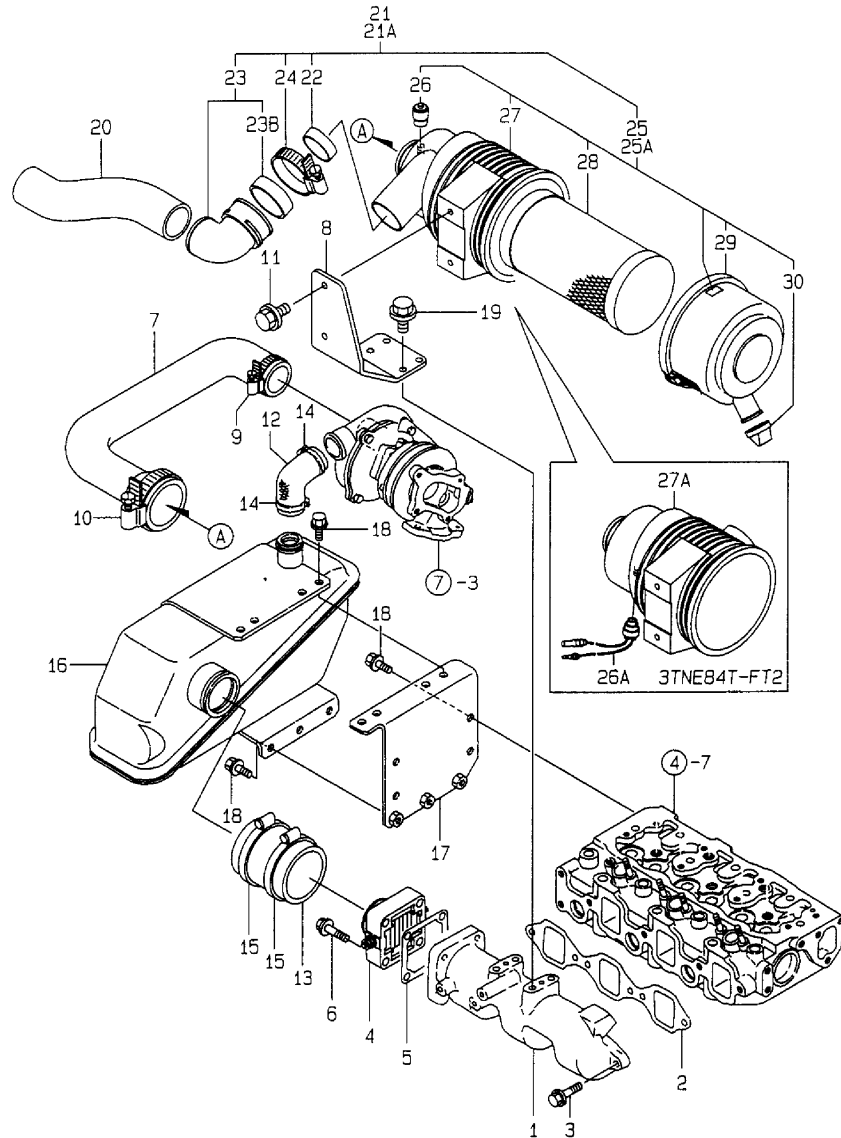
SUCTION MANIFOLD & AIR CLEANER
